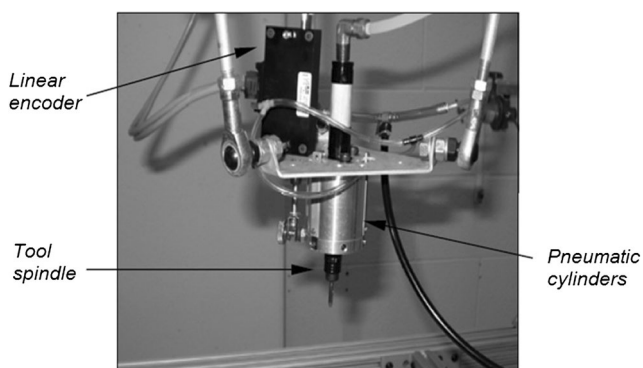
Deburring tool head adaptable on a CNC machine center spindle (Adapted from [111])
